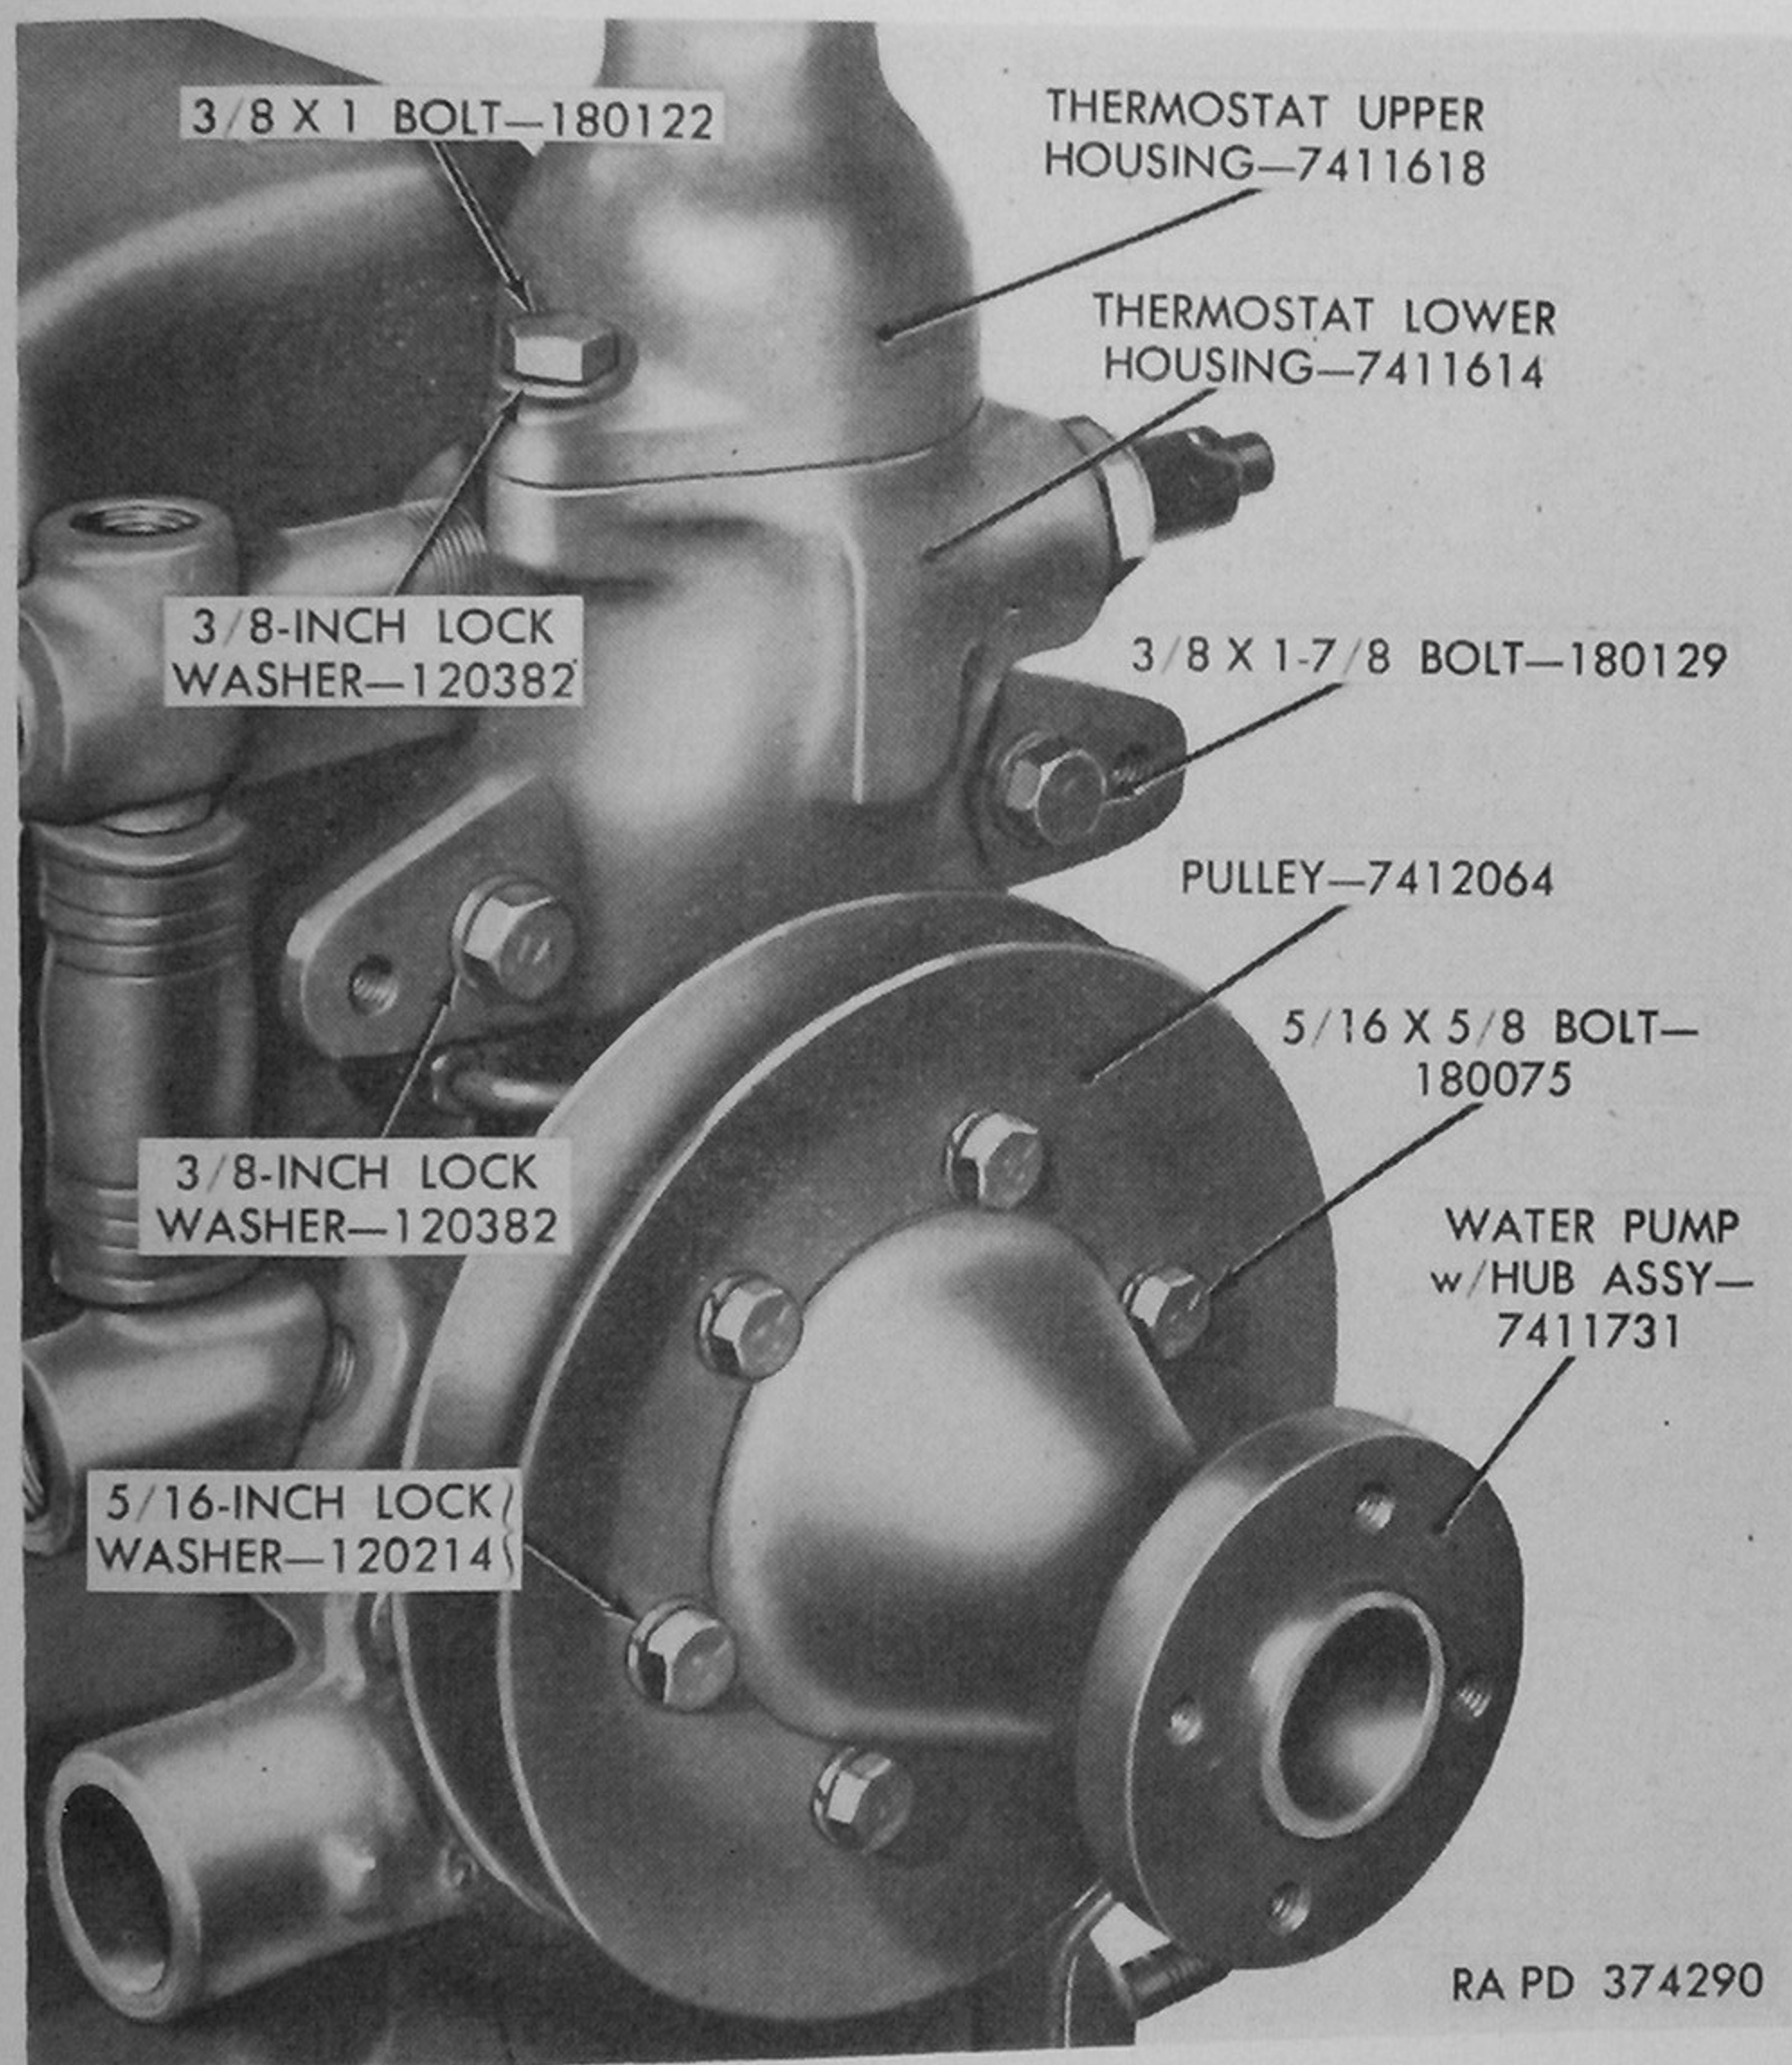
Water pump and thermostat housings installed—engine assembly 7411599.
